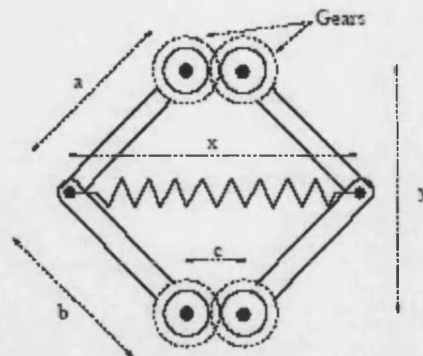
Sketch showing the mounting of the steel tension spring horizontally within a 6-bar linkage mechanism in the JPL hopper. (Hale 2000)
